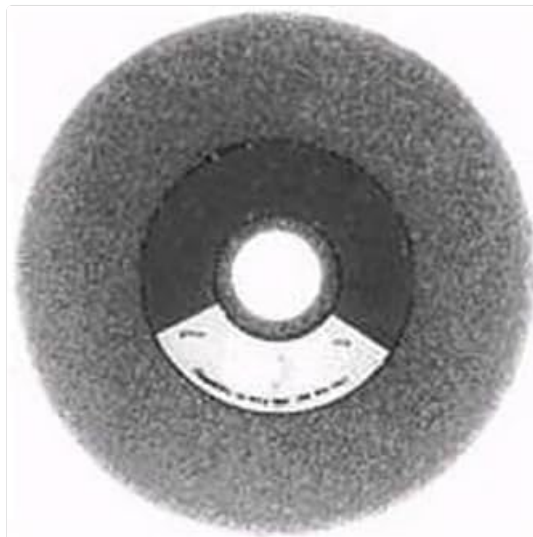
Image: The RATION 3/16 inch replacement grinding wheel, showing its circular abrasive surface and central mounting hole.
